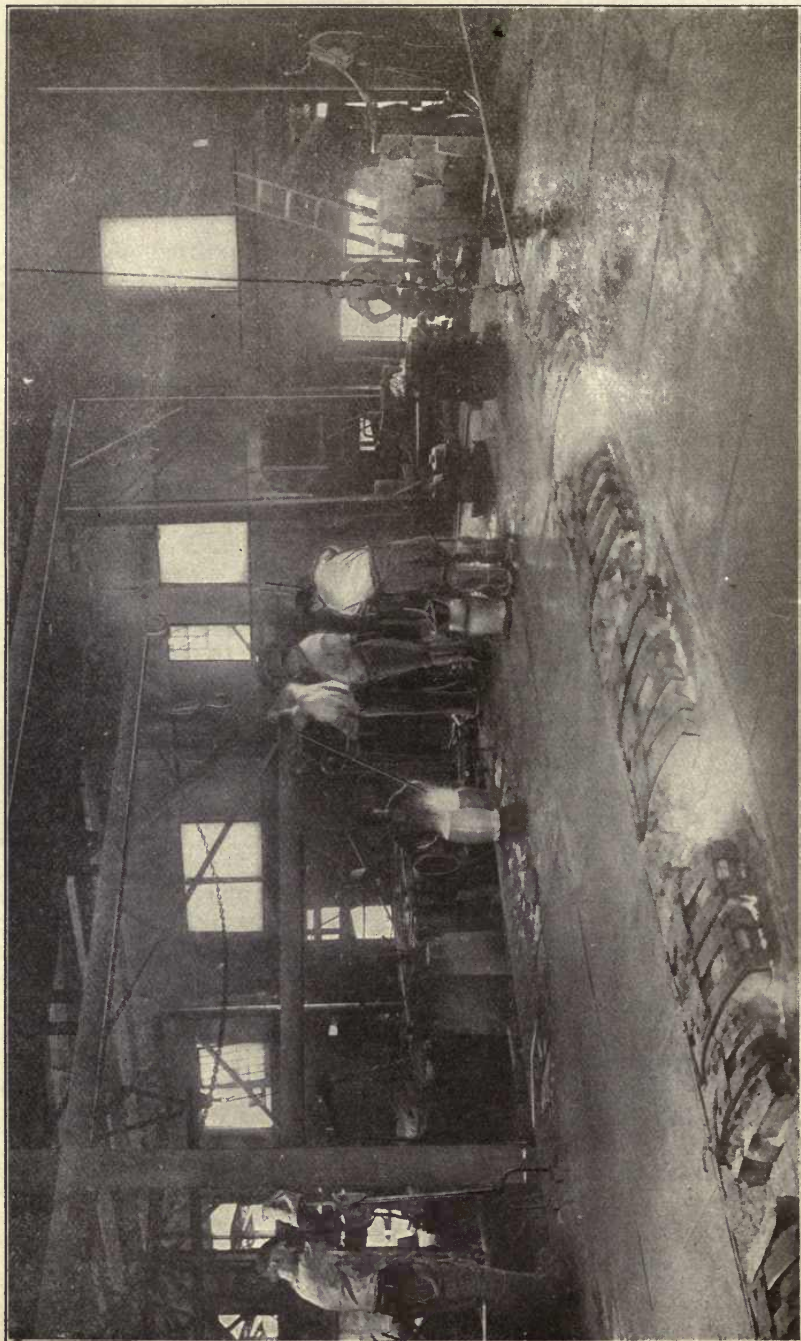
Tool Steel Furnace and Charging Floor at the Heller Brothers Company's Plant, Newark, N. J.
